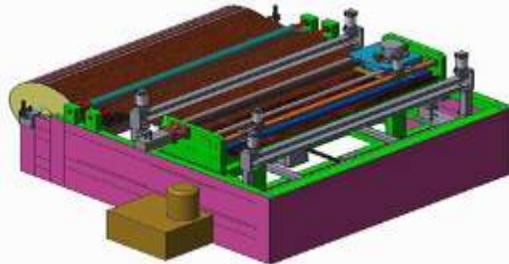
CAD (CREO) Model Showing Conceptual Design of Leather cutting machine.
